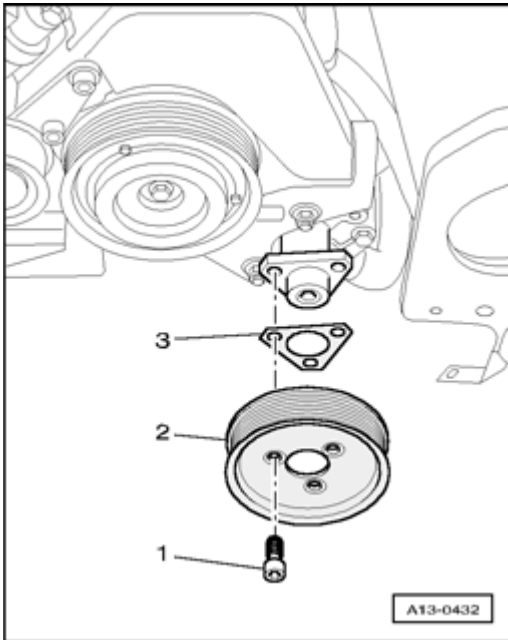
Bolt, Power Steering Pump Belt Pulley & Air Conditioning Compressor Belt Pulley Shims
